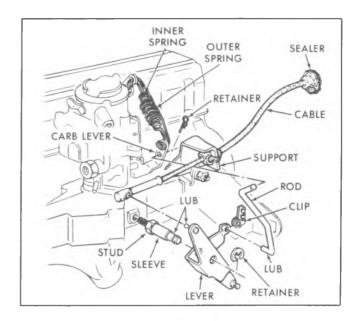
C-74--Accelerator Controls L6-Heavy Duty Emissions.
